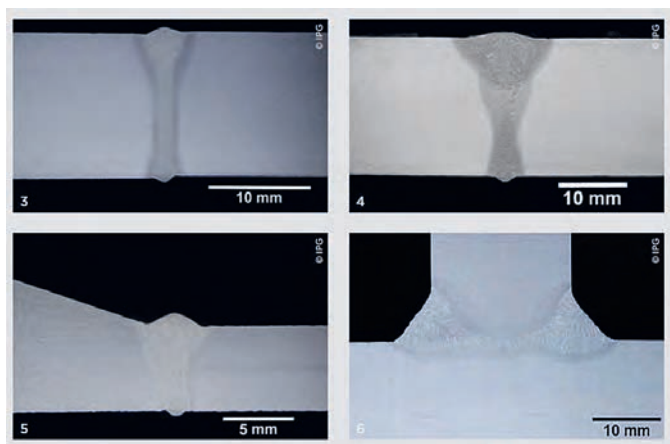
#3: Laser-hybrid butt weld, plate thickness 14 mm. #4: Laser-hybrid + MSG tandem butt weld, plate thickness 20 mm. #5: Laser-hybrid butt weld, 12 to 6 mm with phasing. #6: Full penetration laser-hybrid two sided weld, profile thickness 20 mm.
